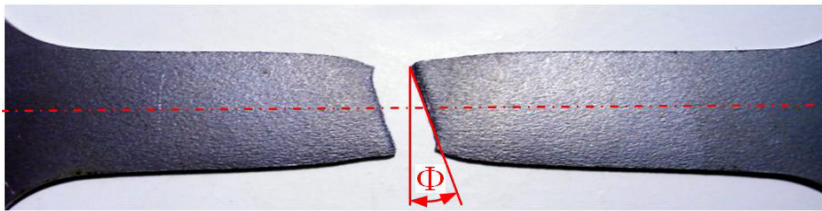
View of specimen after tensile test with marked crack angle  $\Phi$  for stainless steel 303.
